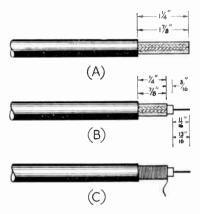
Cable-stripping dimensions for Jones Type P-101 plugs. Smaller dimensions are for ½-inch plugs, the larger dimensions for ½-inch plugs. As indicated in C, the remaining copper braid is wound with bare or tinned wire to make a snug fit in the sleeve of the plug.
